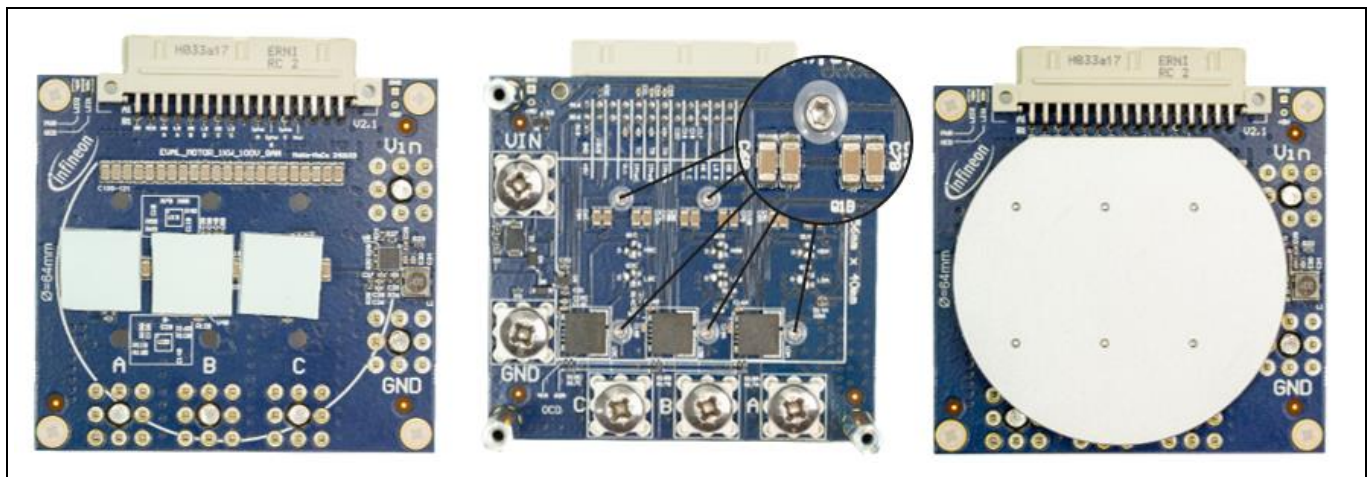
Left: Placement of TIM across the half-bridge with protective films in place, on the top. Center: Assembly of the tightened mounting screw along with a protective washer in place. Right: Fully assembled evaluation board with heat-spreader
